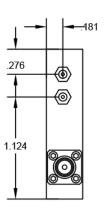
HL5877 mechnical drawing (opt. -29-JJ), inches
